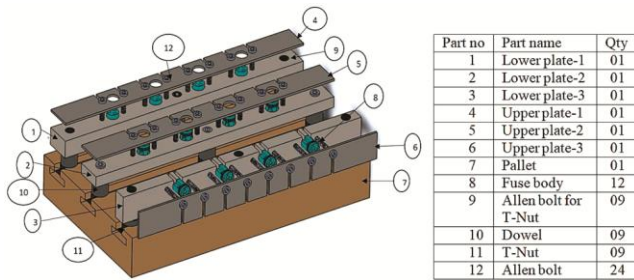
Type-A fixture for holding 12 fuse bodies
